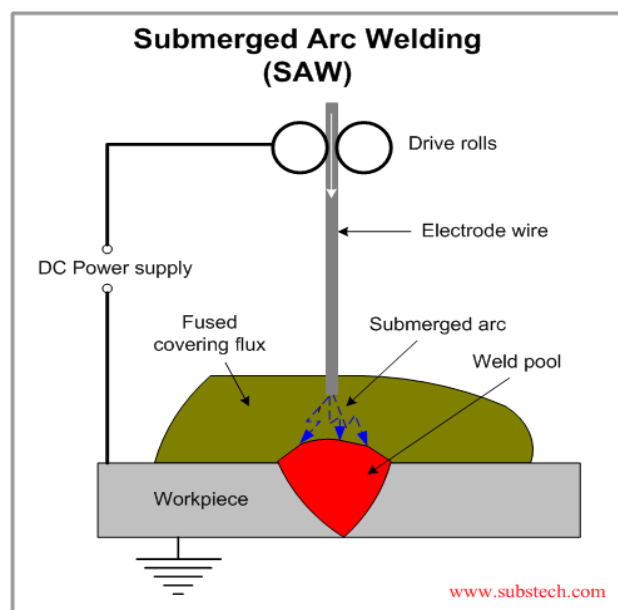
Submerged Arc Welding (SAW) Process
